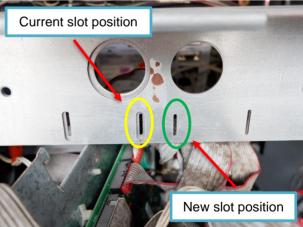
b - Relocate the PCB metal mounting bracket to the new position.
